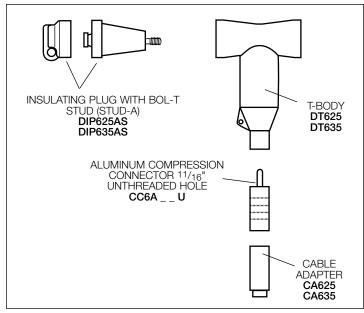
BOL-T Connector Kit (BT6_5) Components. For more details, see catalog sections 600-10, 600-30 and 600-50.
